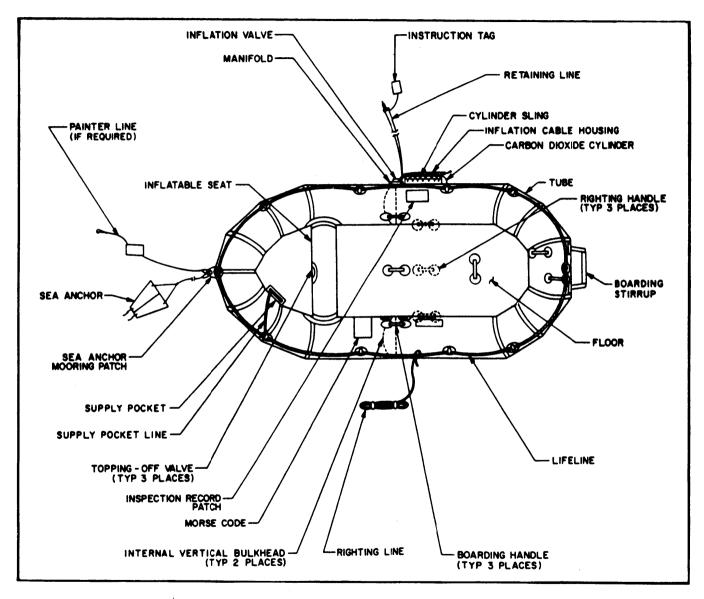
LRU-12/A life raft assembly, parts nomenclature.
